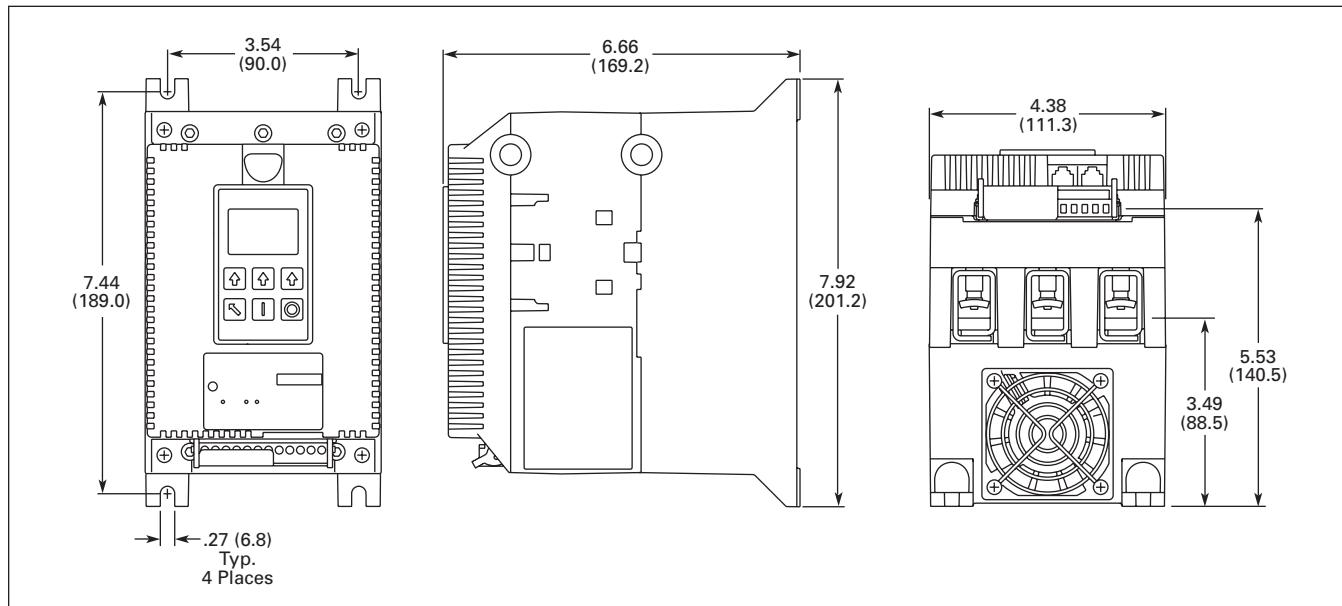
R-Frame (110 mm) S811 Approximate Dimensions in Inches (mm)
